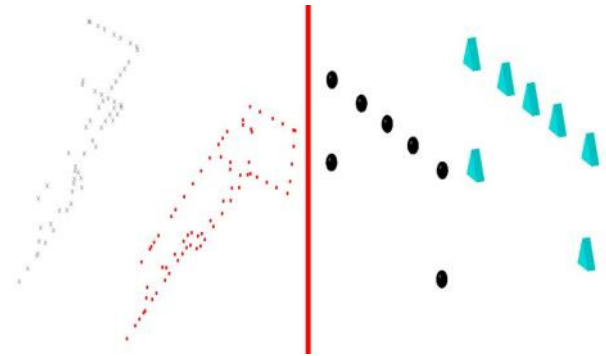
Extraction of only welding point set using K-means clustering
